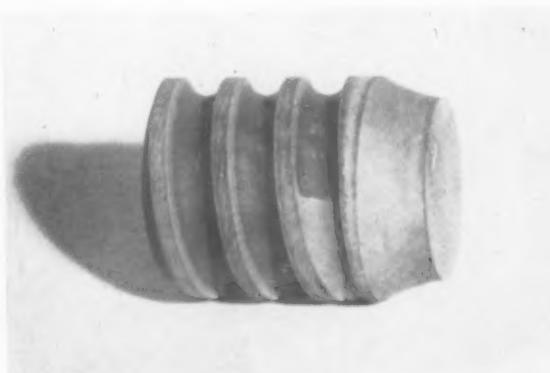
An extra grinding operation here caused burning, as indicated by the partially etched section.
